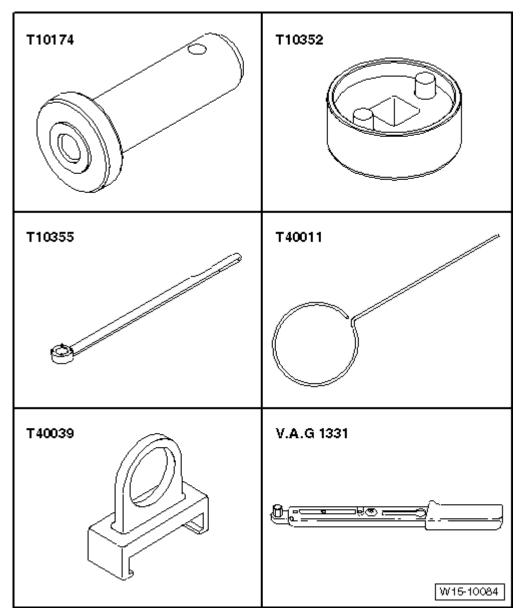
Identifying Thrust Piece -T10174-, Torque Wrench -V.A.G 1331- And Special Tools Courtesy of VOLKSWAGEN UNITED STATES, INC.
